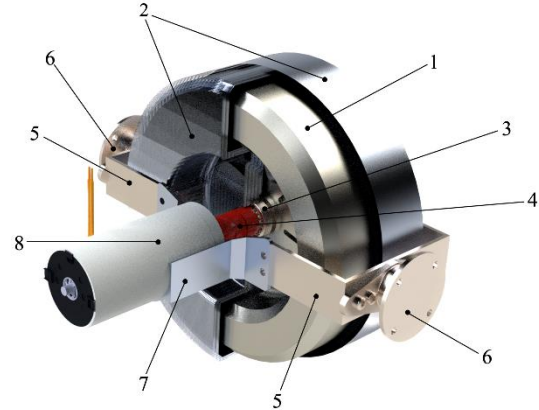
CMG group final design. 1) Flywheel; 2) Carters; 3) Bearings to decouple flywheel and carter motion; 4) Jaw coupling; 5) Tilting plates; 6) Bearing connection to pendulum structure; 7) Spinning motor housing; 8) Stepper motor.
